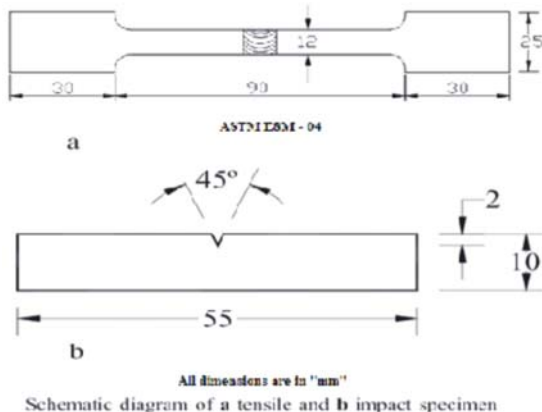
(a) Dimensions of flat tensile specimen (ASTM E8M-04). (b) Dimensions of flat impact specimen.
